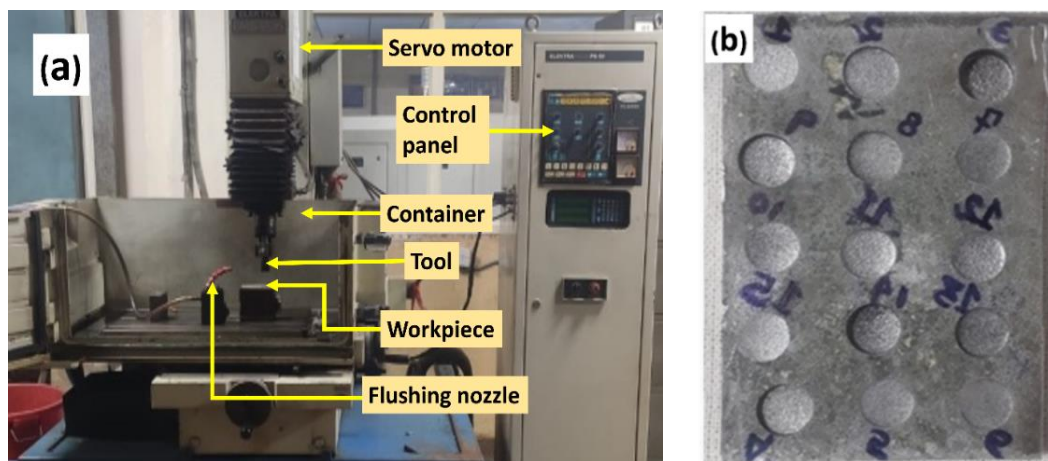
Illustration of EDM machining: (a) EDM machine, (b) workpiece material after machining
